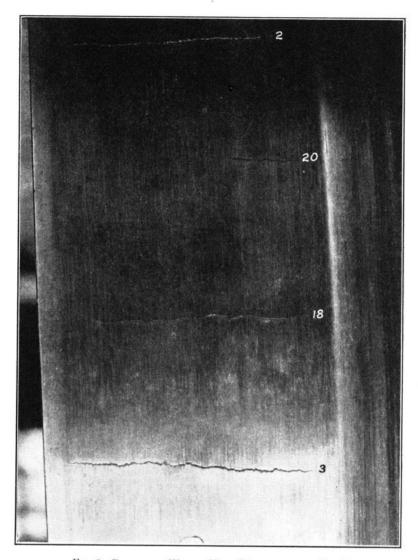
CRACKS IN WHEEL NEAR THERMOCOUPLE NO. 2
